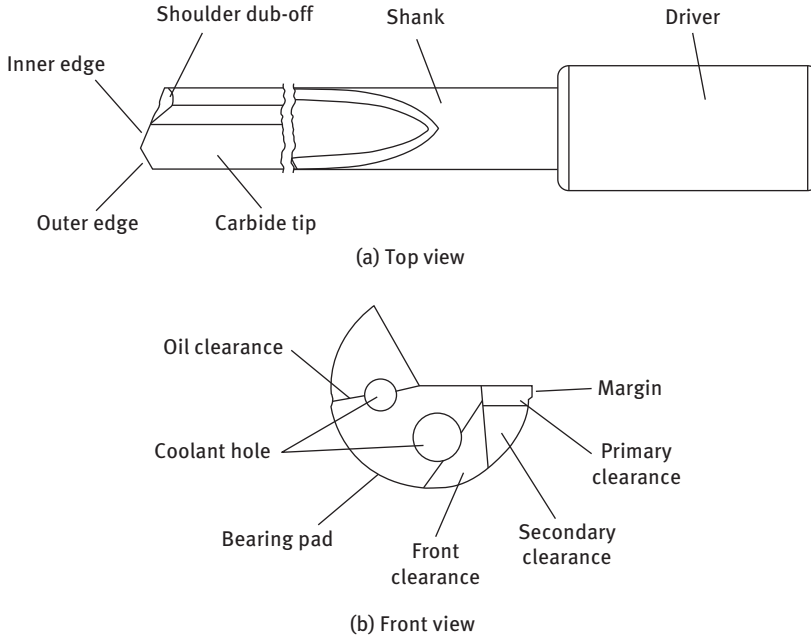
Gun drill features and geometries: (a) Top view and (b) front view.
